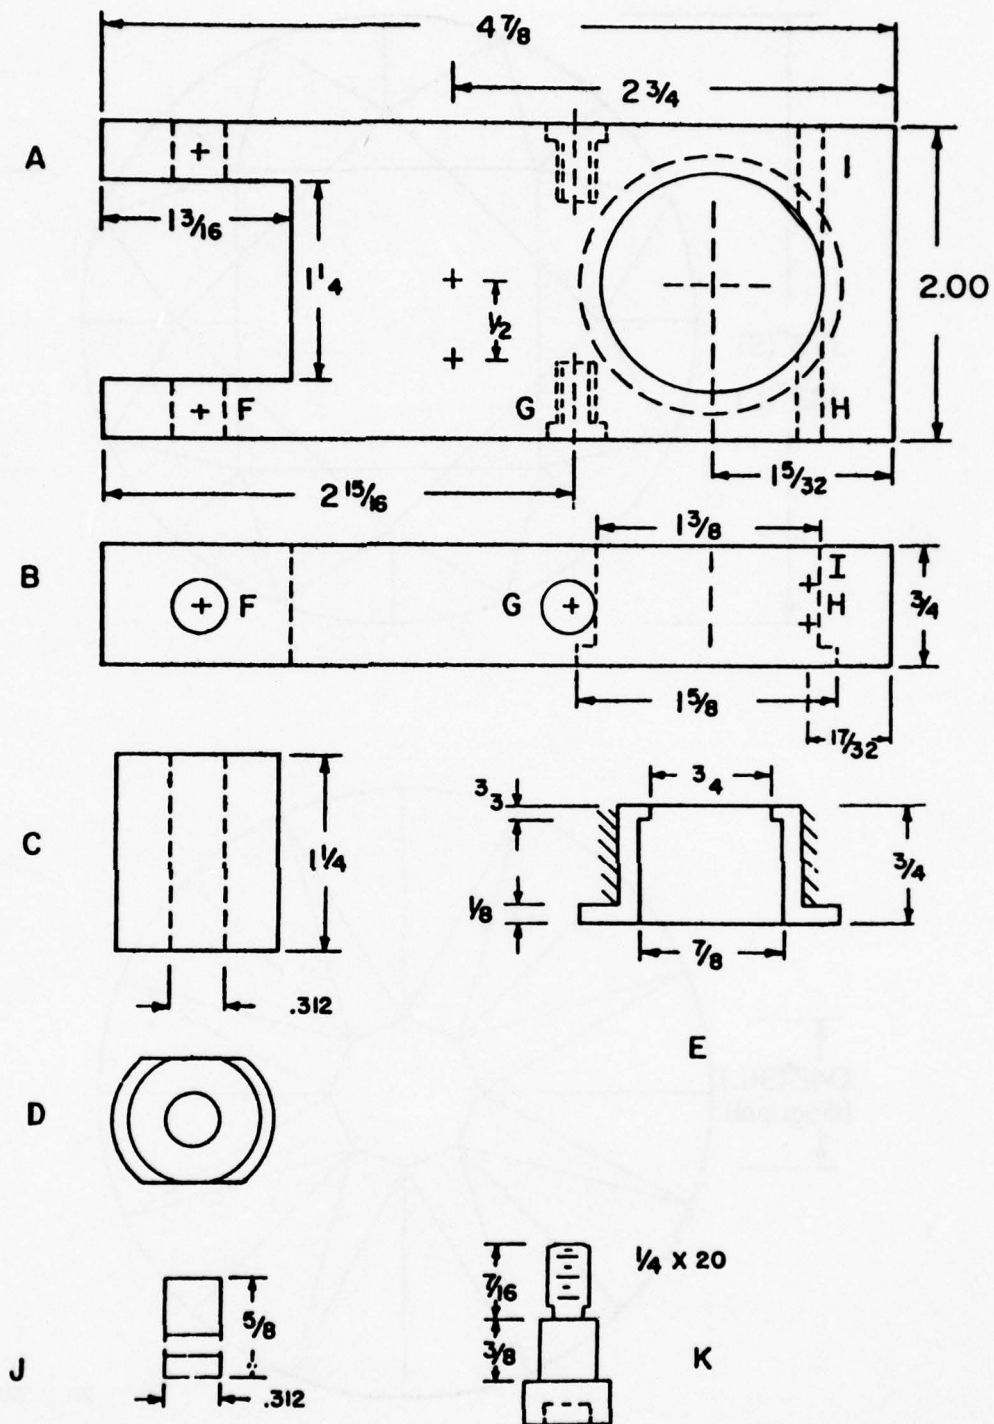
Diamond Anvil Cell Holder and Pressure Generating Assembly
